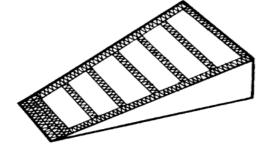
Stinger bead hardfacing pattern for smaller aggregates [53]
